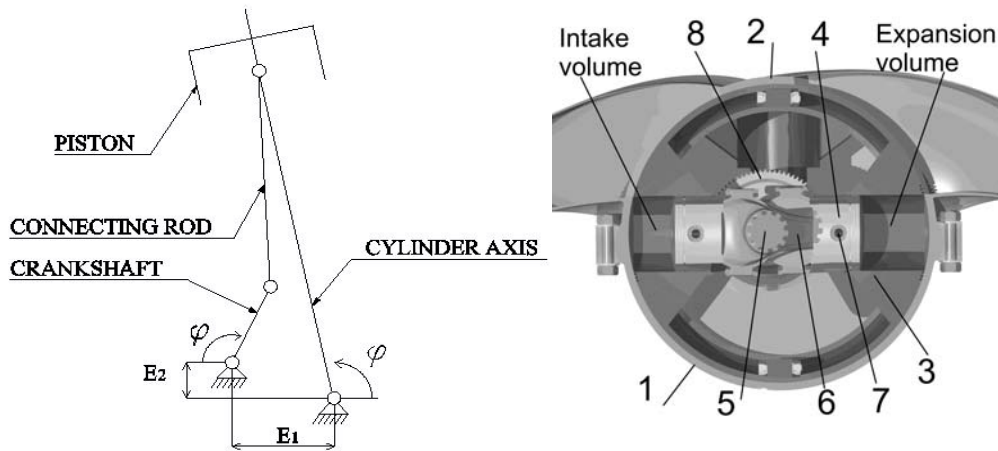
Kinematics scheme and CAD model of the new piston mechanism [5]
